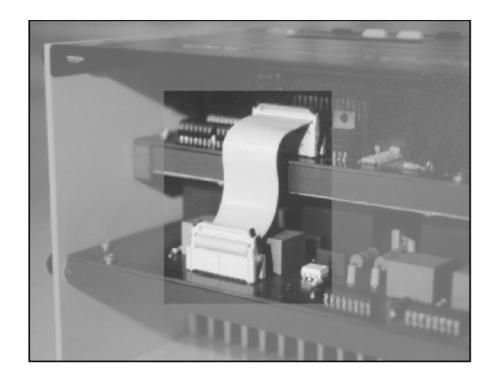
View from the rear: Unlatch the bottom ribbon cable plug before swinging up the main printed board and pull up and off.
